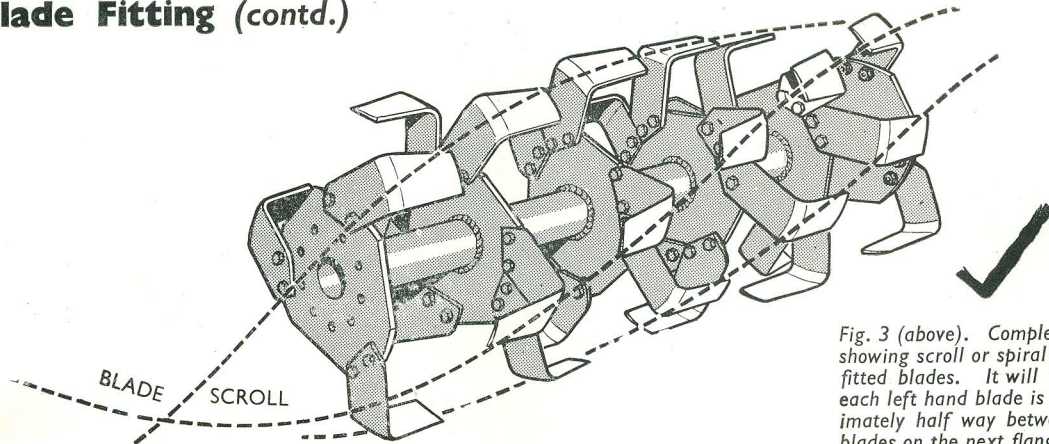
(above). Completed blade assembly showing scroll or spiral effect of correctly fitted blades. It will be noticed also that each left hand blade is facing and approximately half way between two right hand blades on the next flange and vice versa
